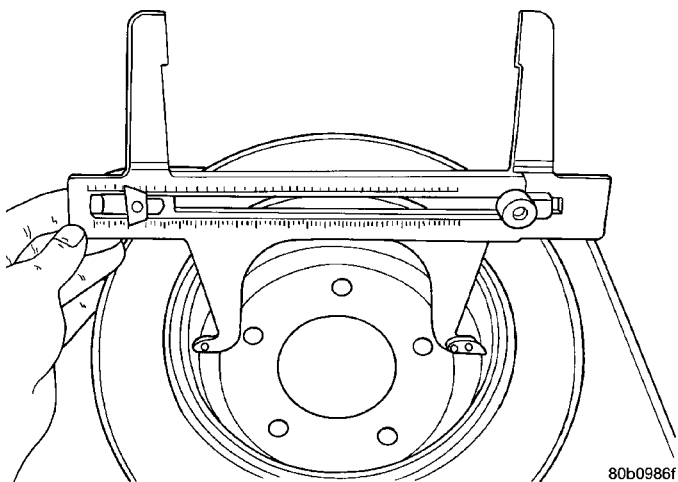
MEASURING PARK BRAKE DRUM DIAMETER
